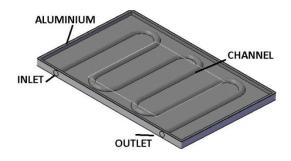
Schematic view of mini-channel Heatsink with closed glass cover.
